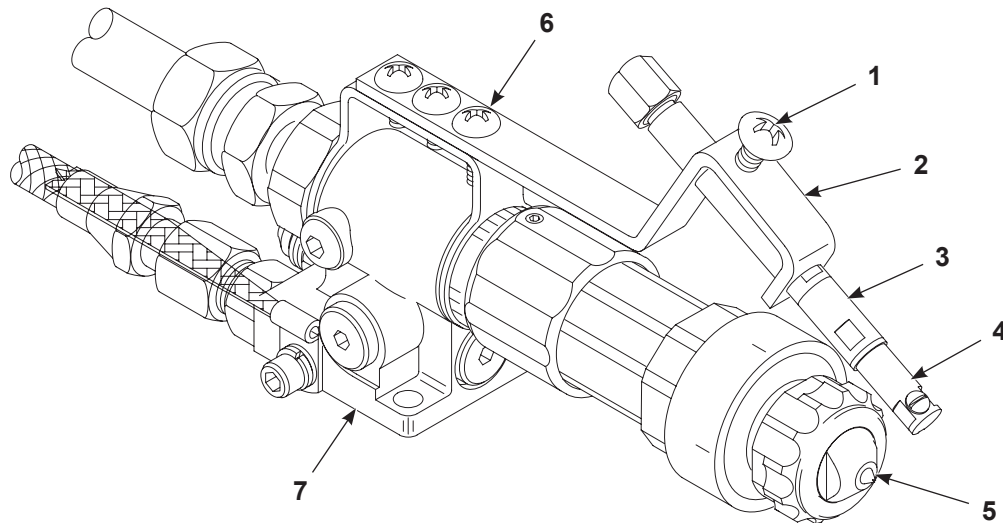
Bracket and Strap Assembly, Check Valve, and Nozzle Installation on MEG Gun
